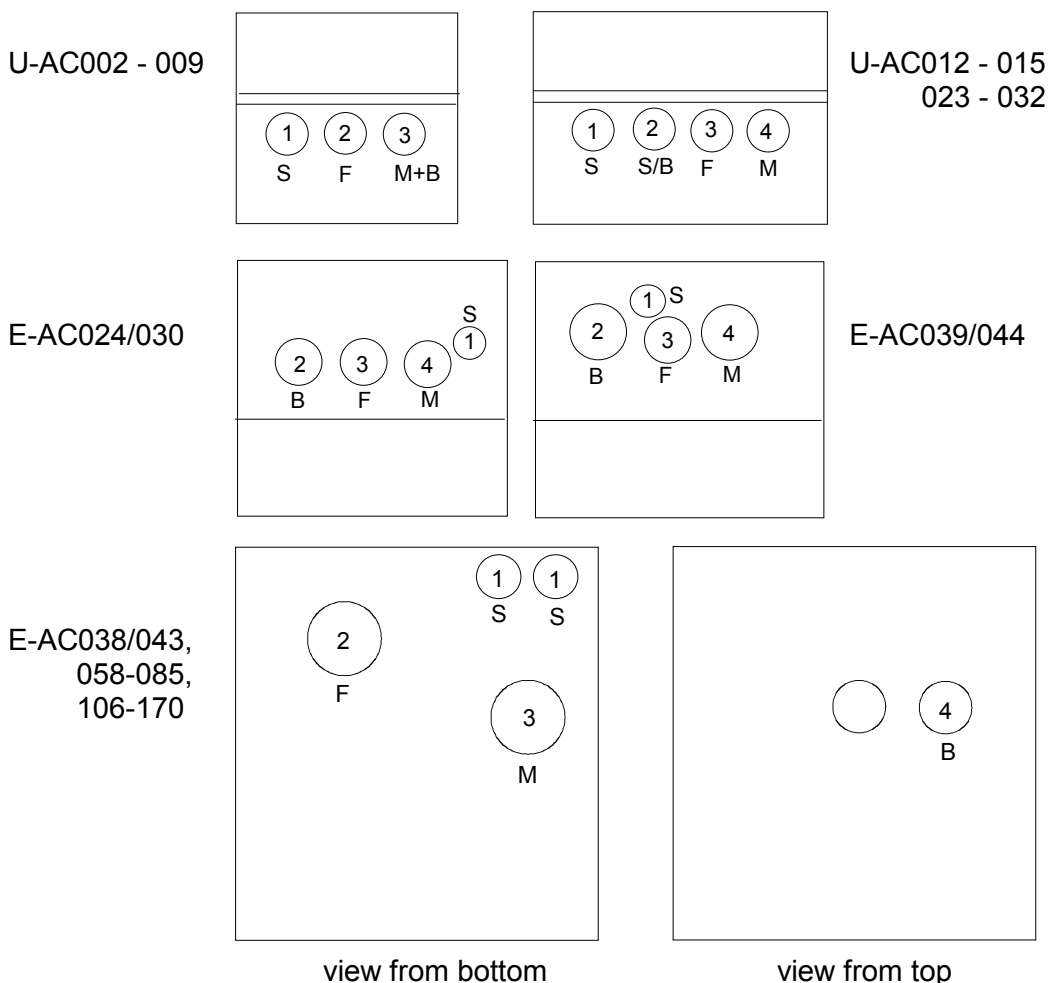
Layout and dimensions of mounting holes for cable entry glands
